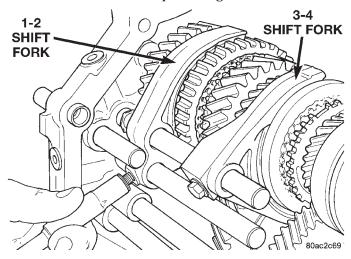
Remove Shift Fork To Shift Rail Bolts
